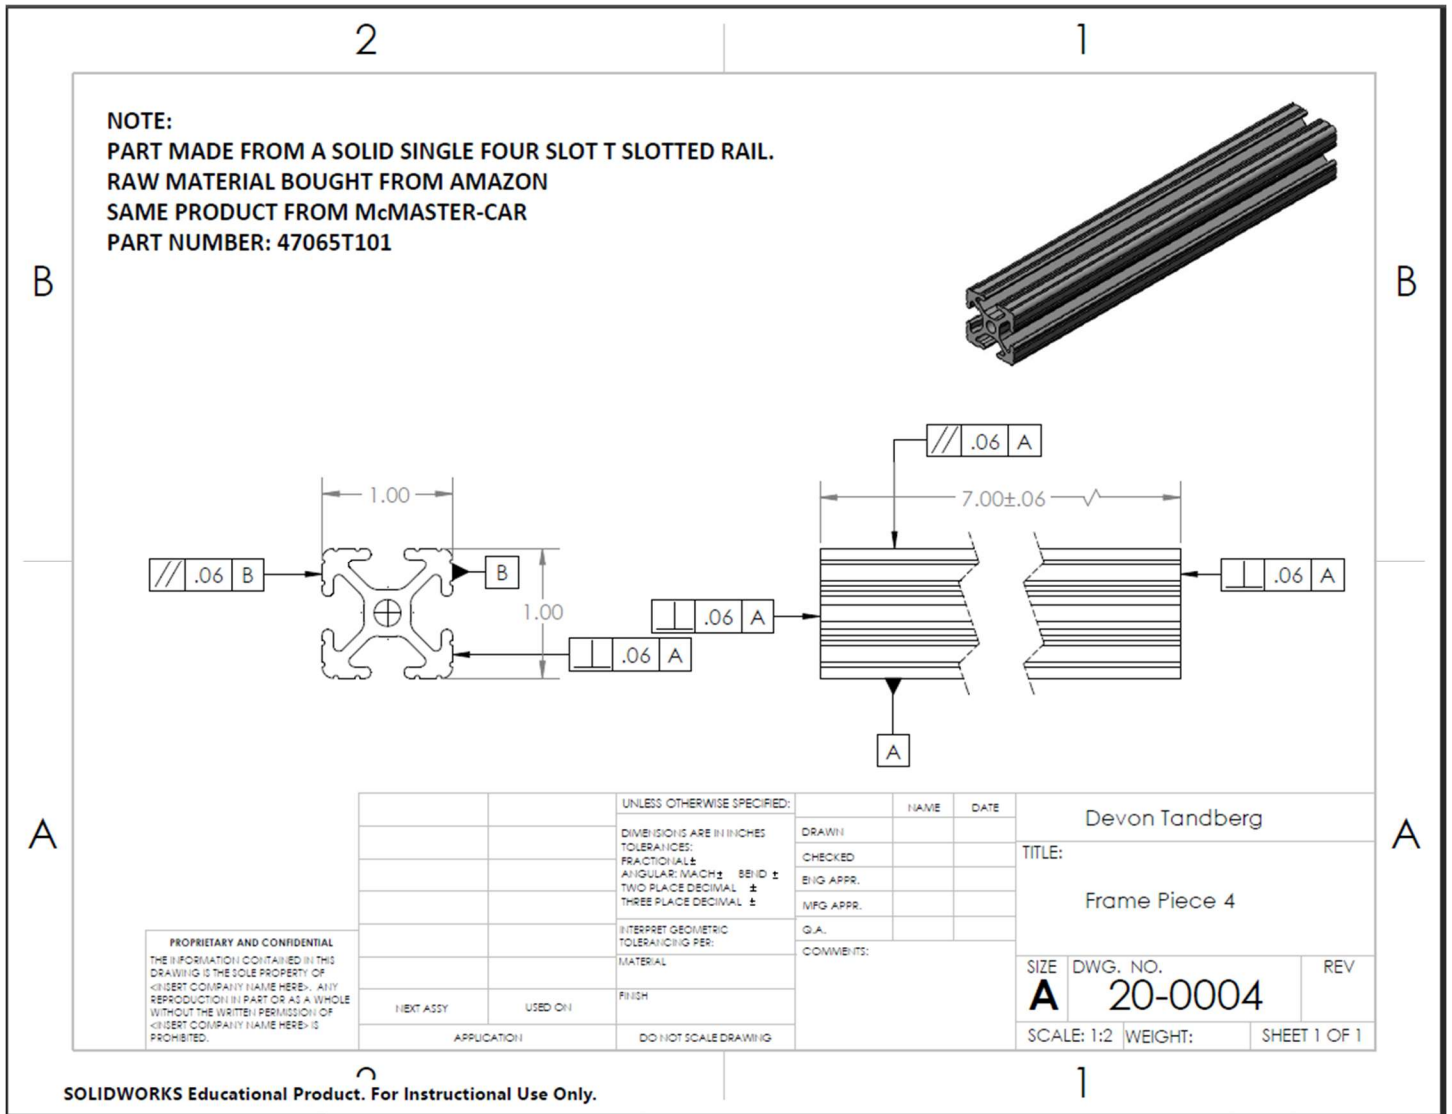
Part 20-0004 Drawing – Frame Piece 4 Length 7”
